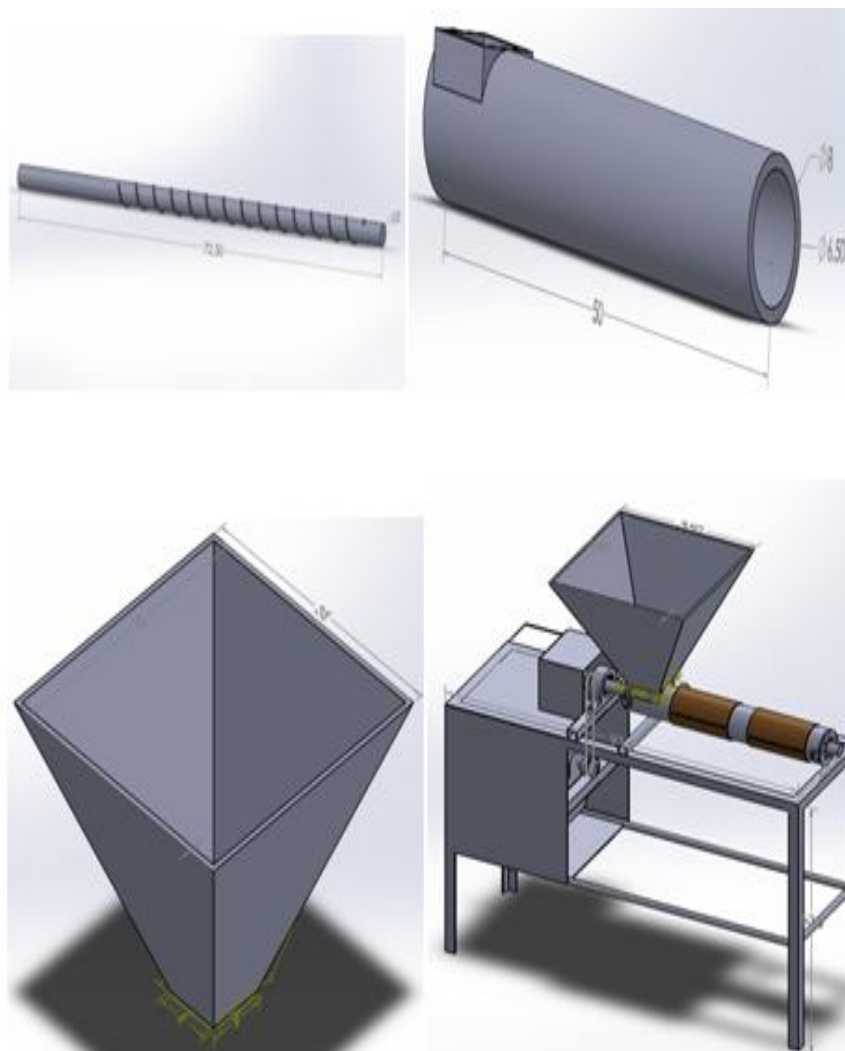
Drawing of the screw thread, Barrel, Hopper and Side view of the Pelletizing Machine
